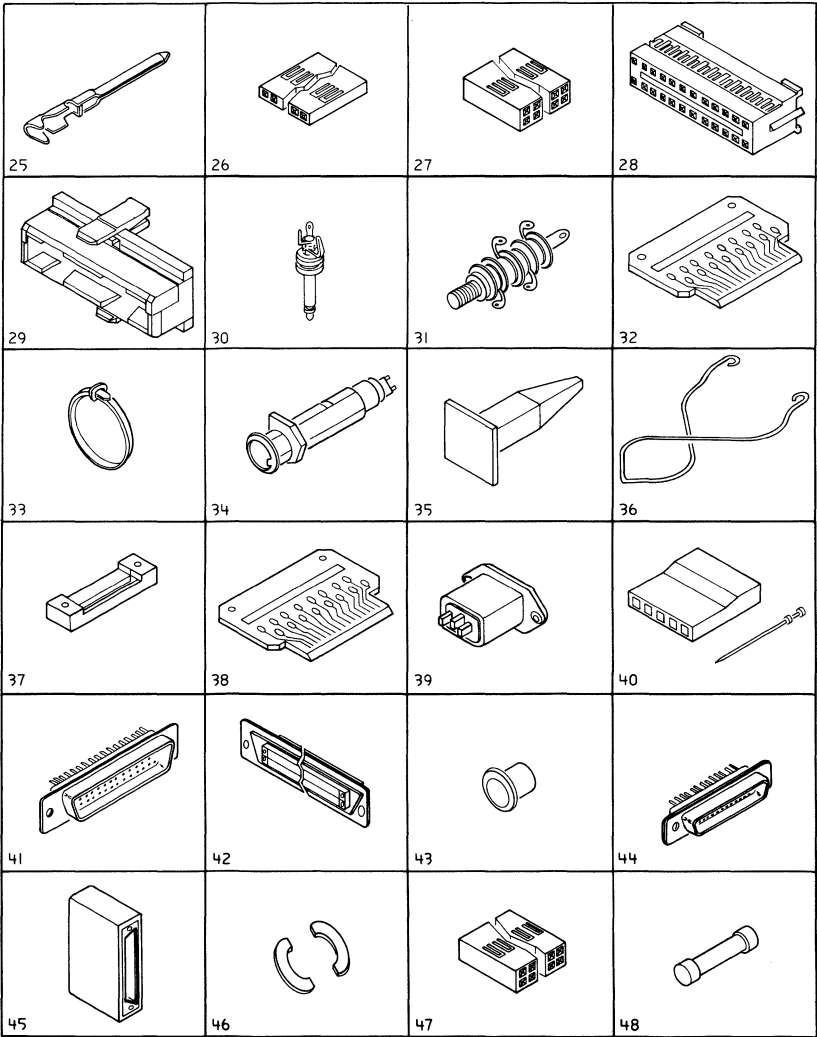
CABLE ASSEMBLIES AND COMPONENT PARTS (4 of 5)
